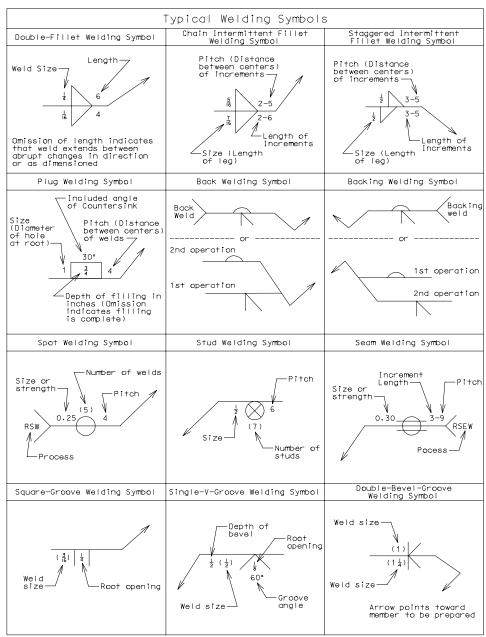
Standard Welding Symbols from AWS A2.4
